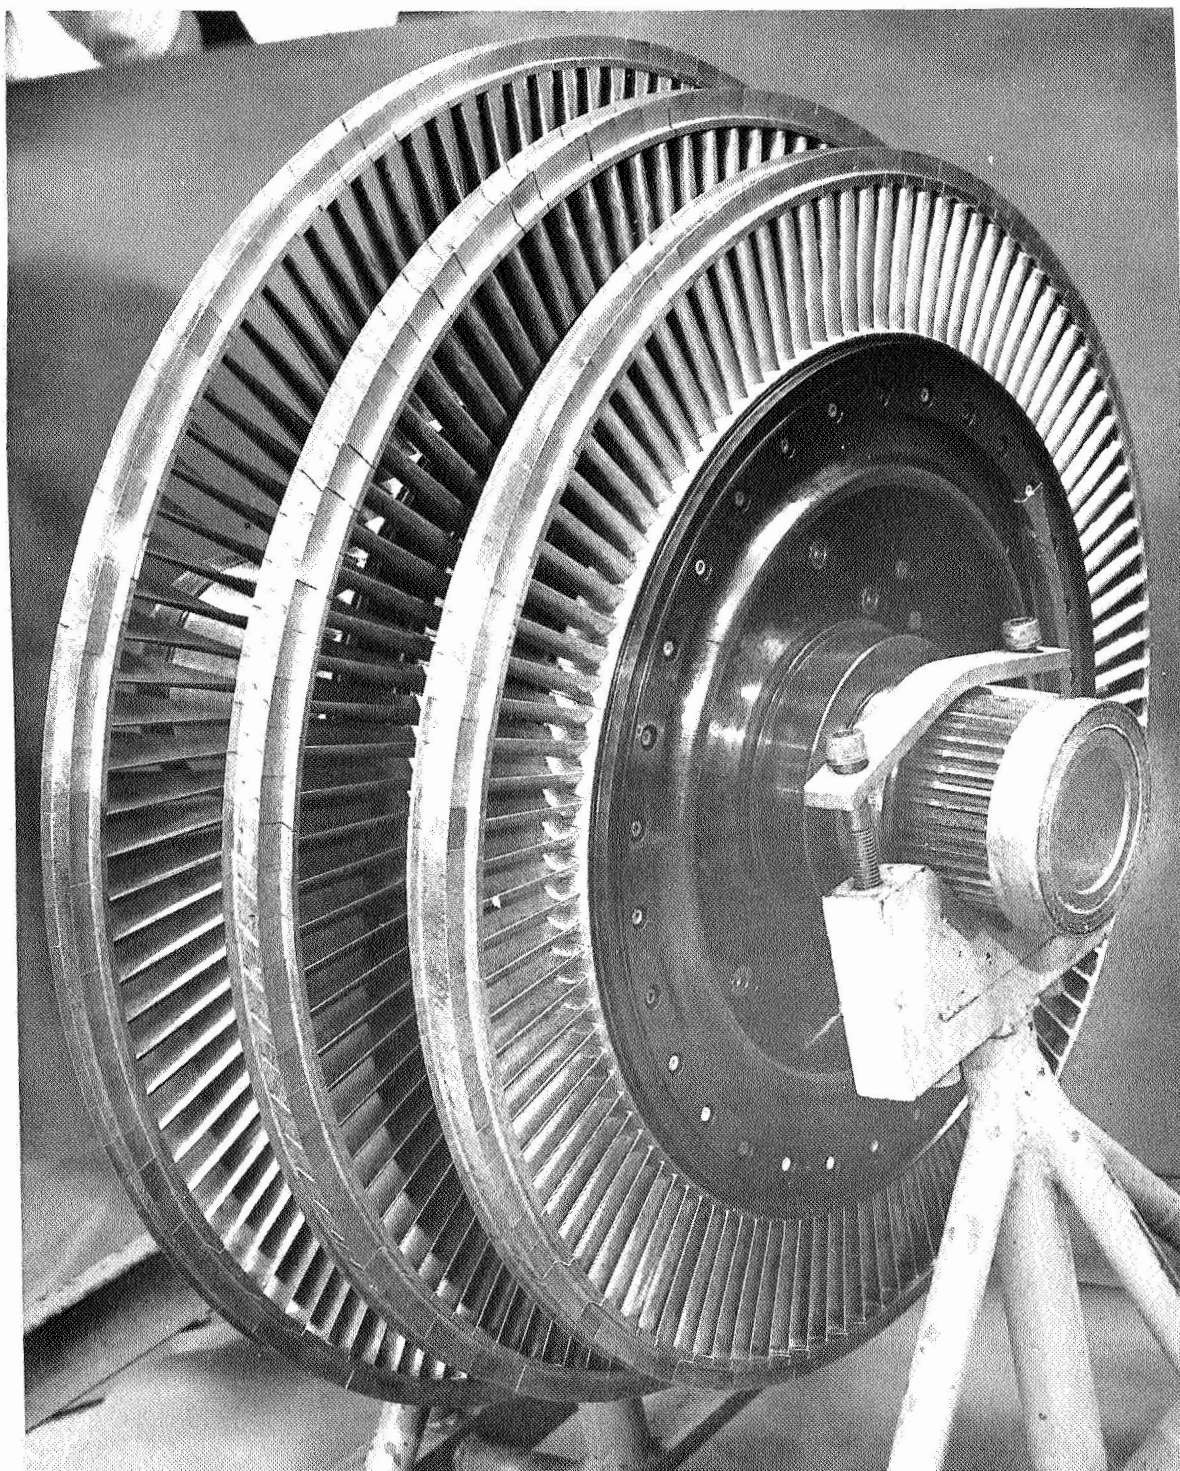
Three-Stage Turbine Plain Blade Rotor Assembled.
